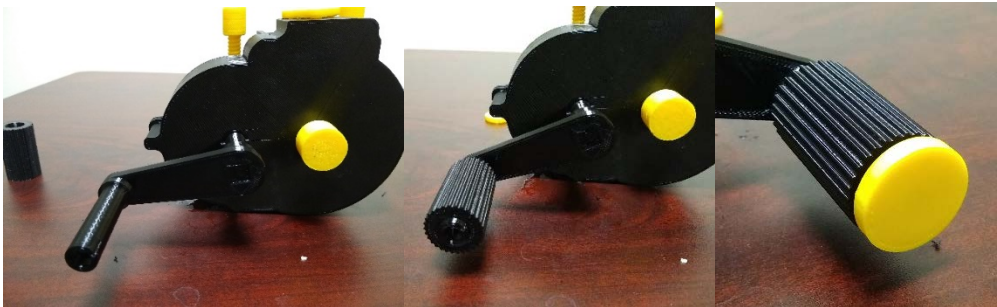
a) Attaching handle N, and b) grip and c) lock.
